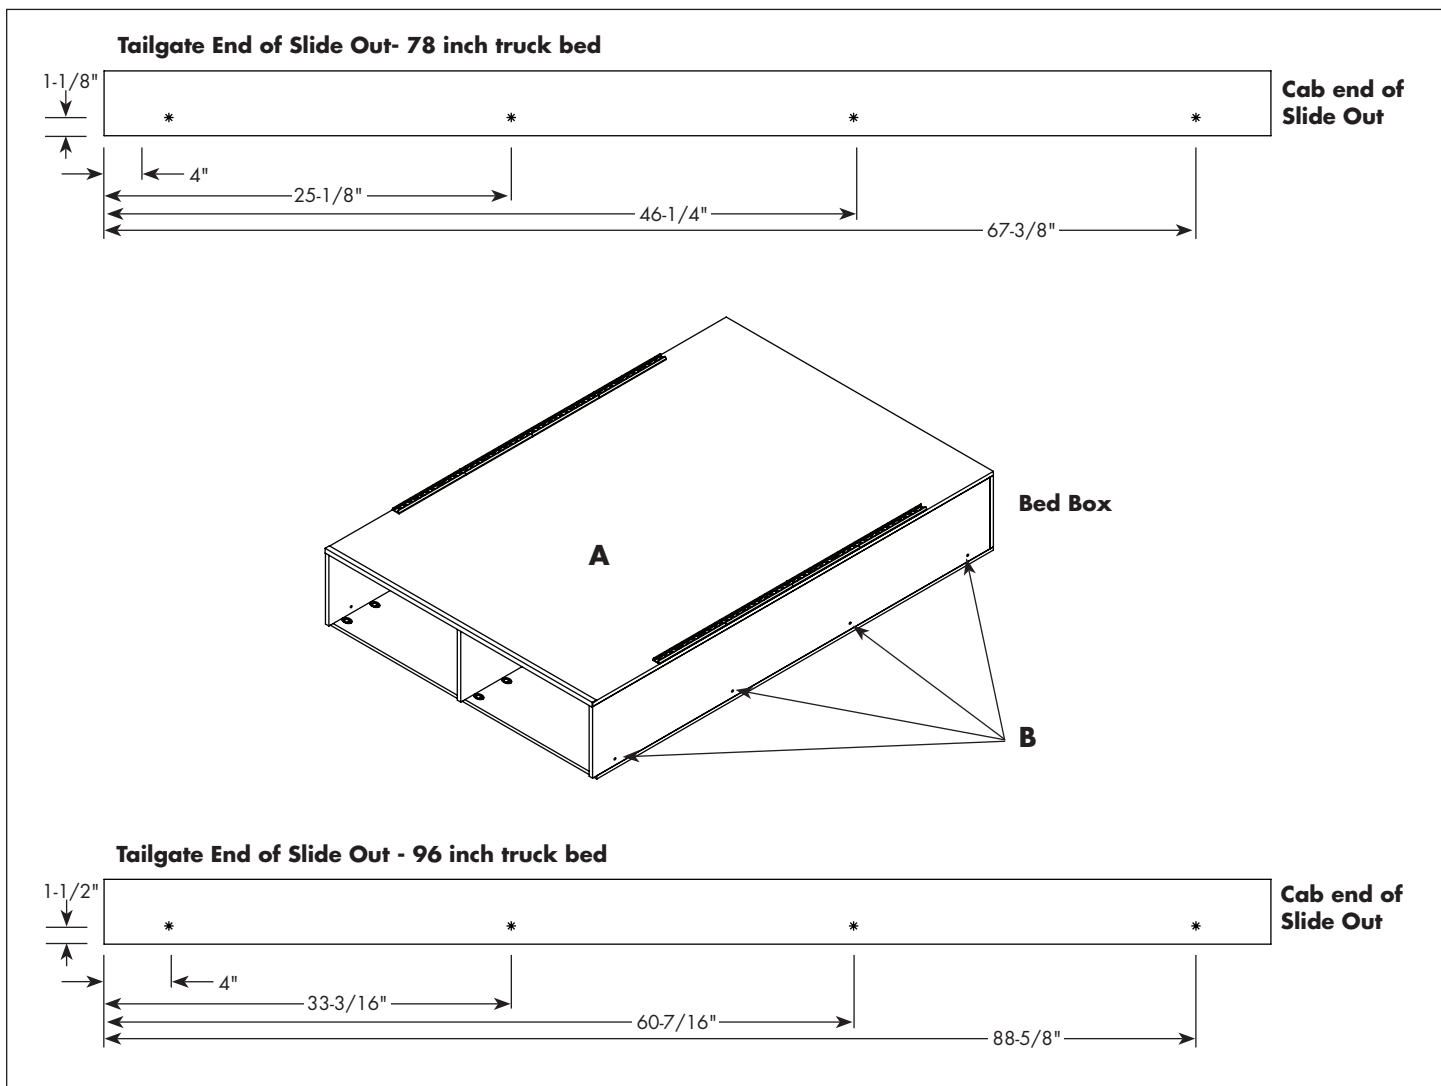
Slide Out side rail drill points and Bed Box mounting locations (B)
